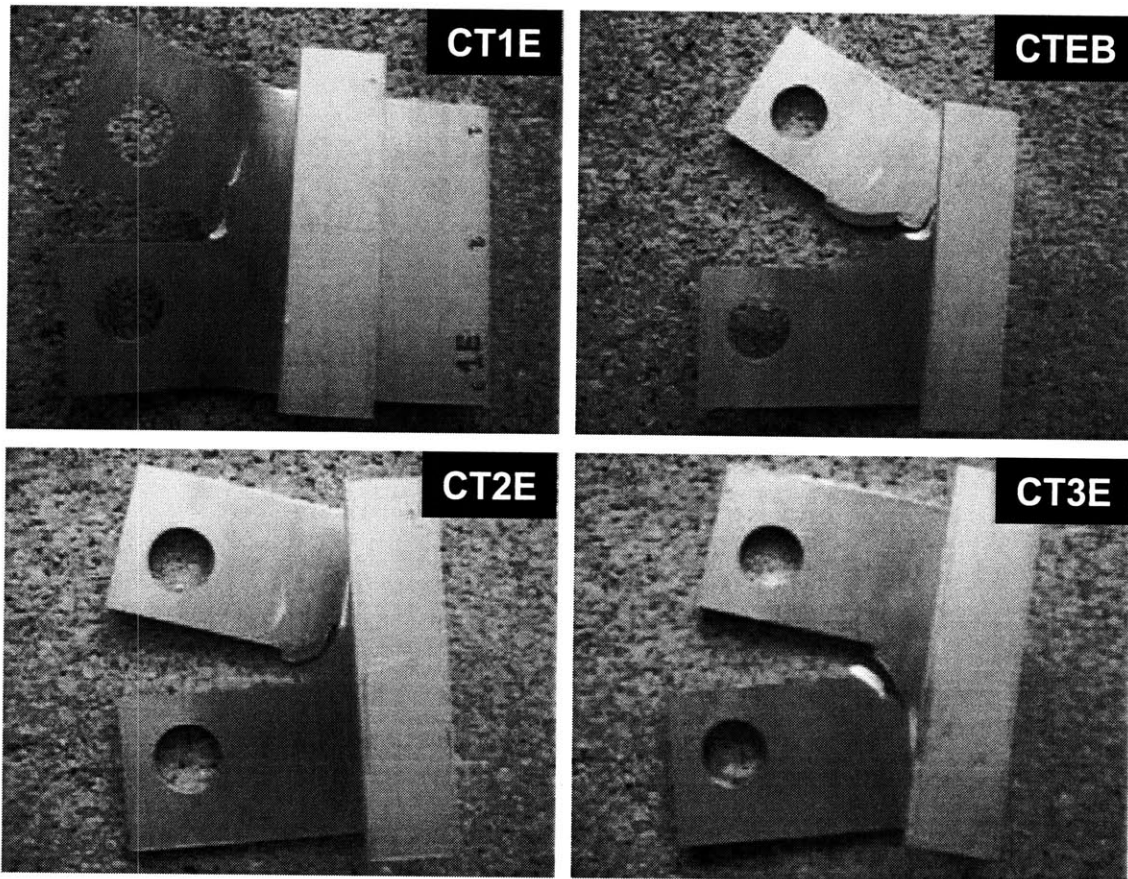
Compact Tension specimens (CTE) with T-type extruded stiffeners
